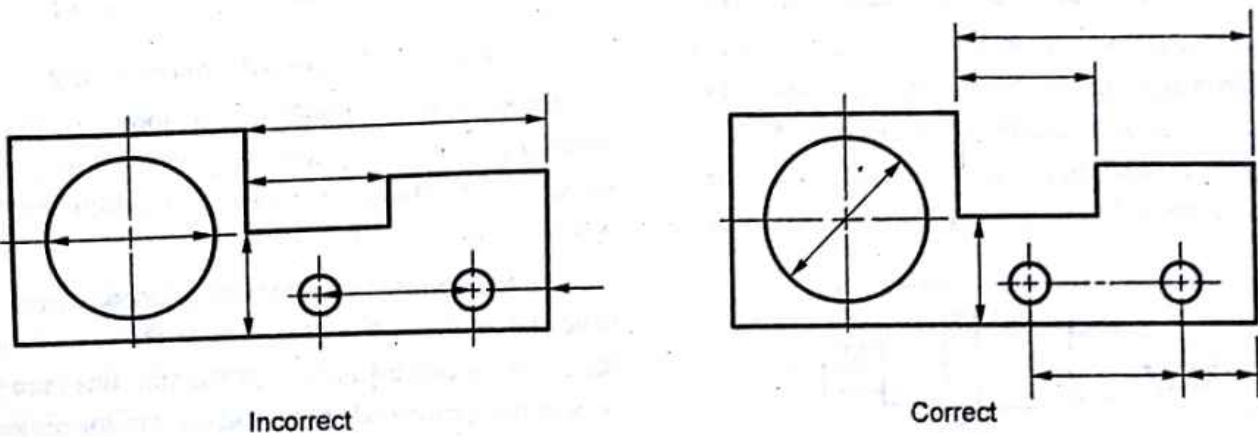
Crossing of dimension and extension lines should be avoided
